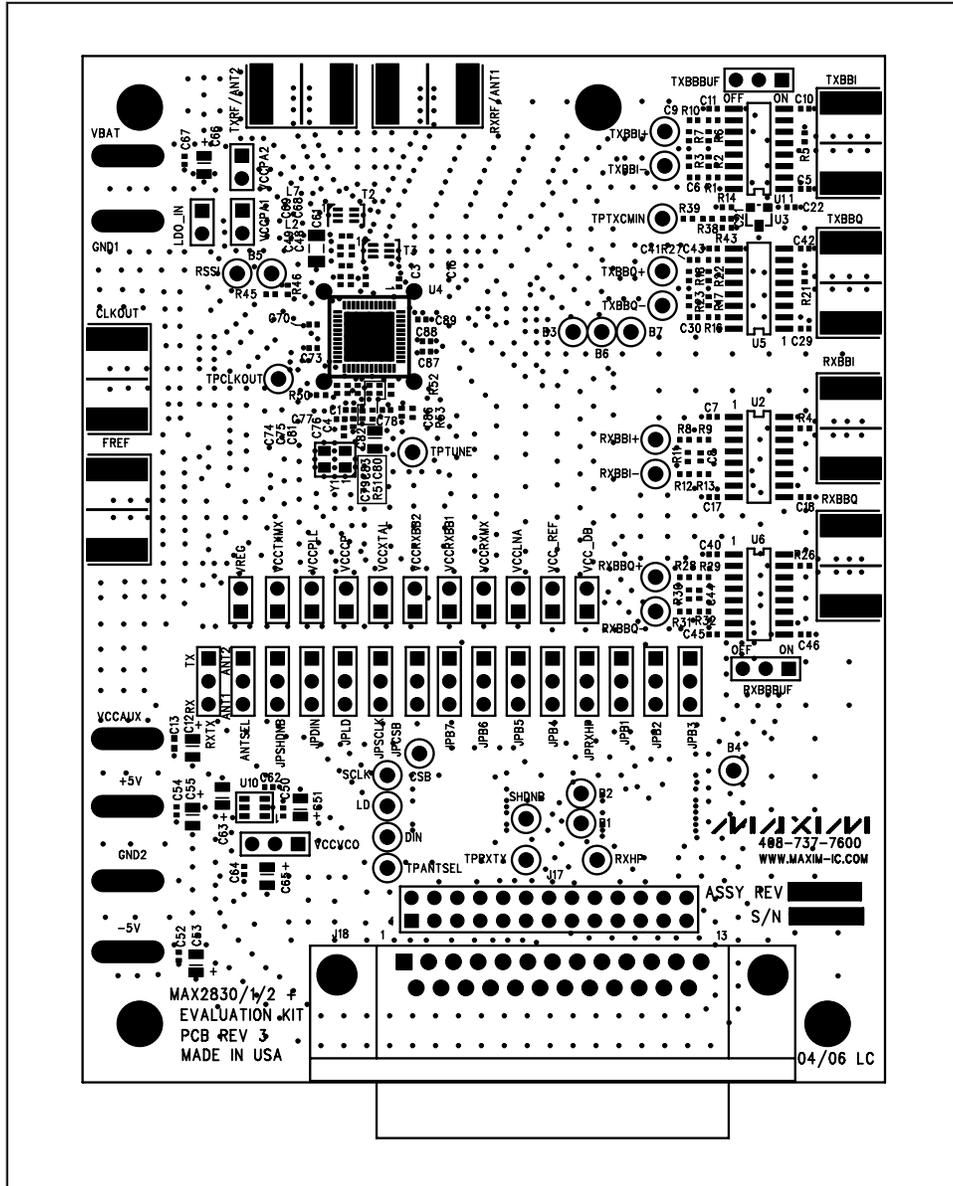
MAX2830 EV Kit PCB Layout—Top Silkscreen
